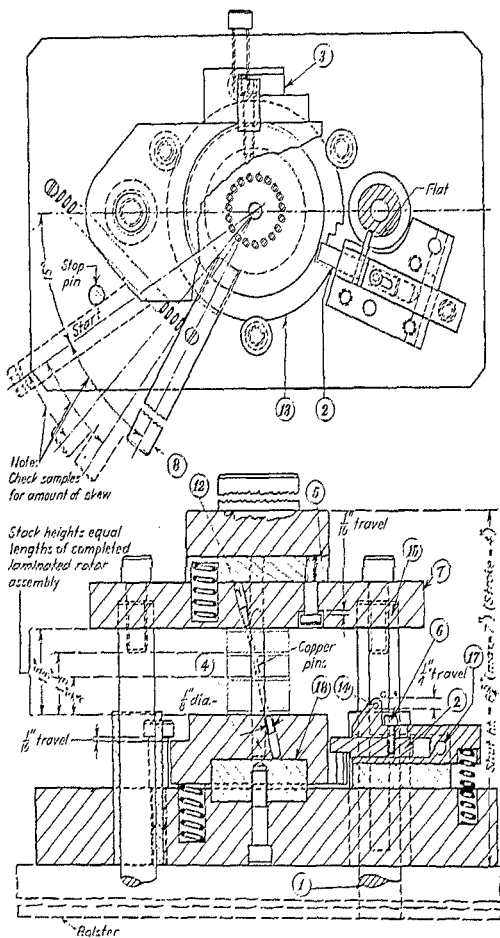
Riveting and skewing die. (Harig Mfg. Corp.)
